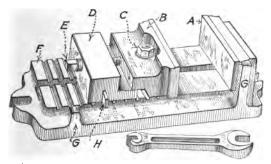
Drill press vise. (Skinner Chuck Co.)
